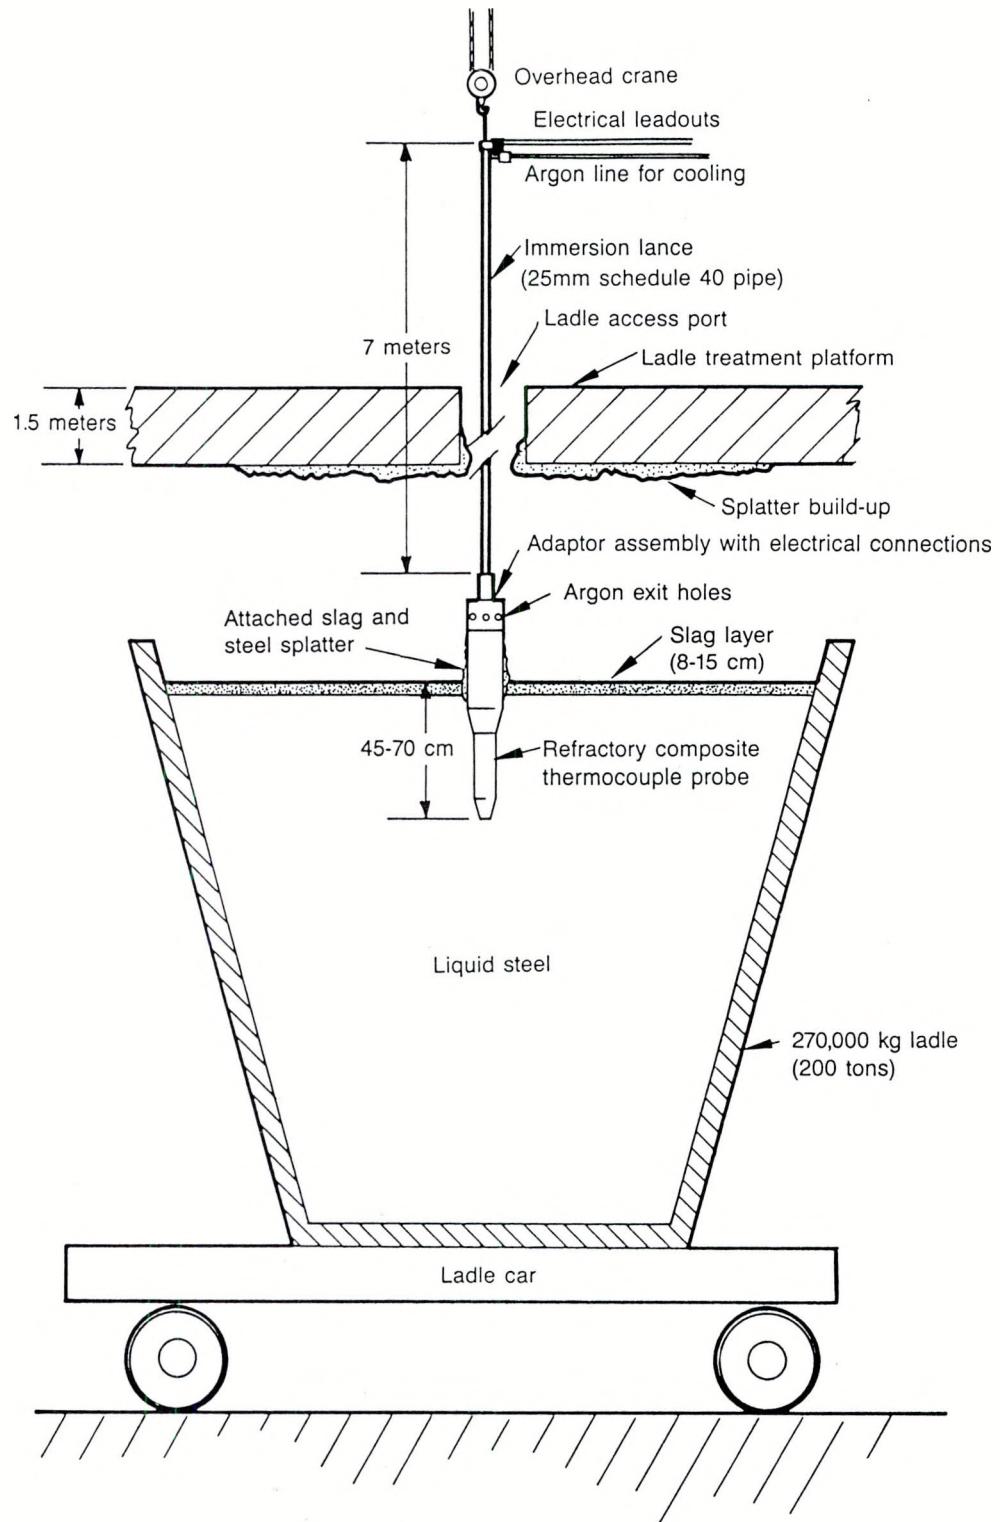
Schematic diagram of thermocouple installation at Bethlehem Steel Corporation's Sparrows Point Plant.
